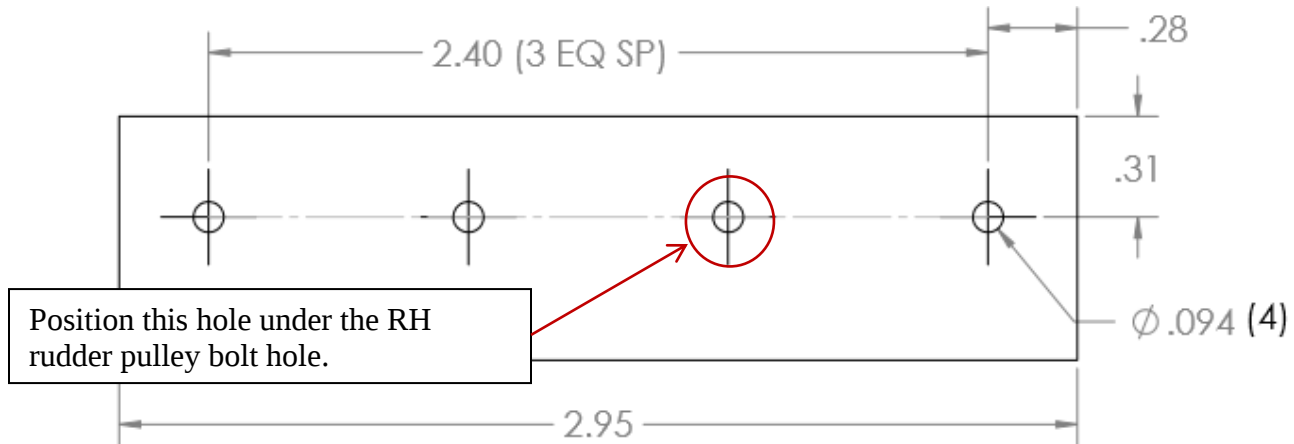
POSITION OF RIVET HOLES IN CLIP
